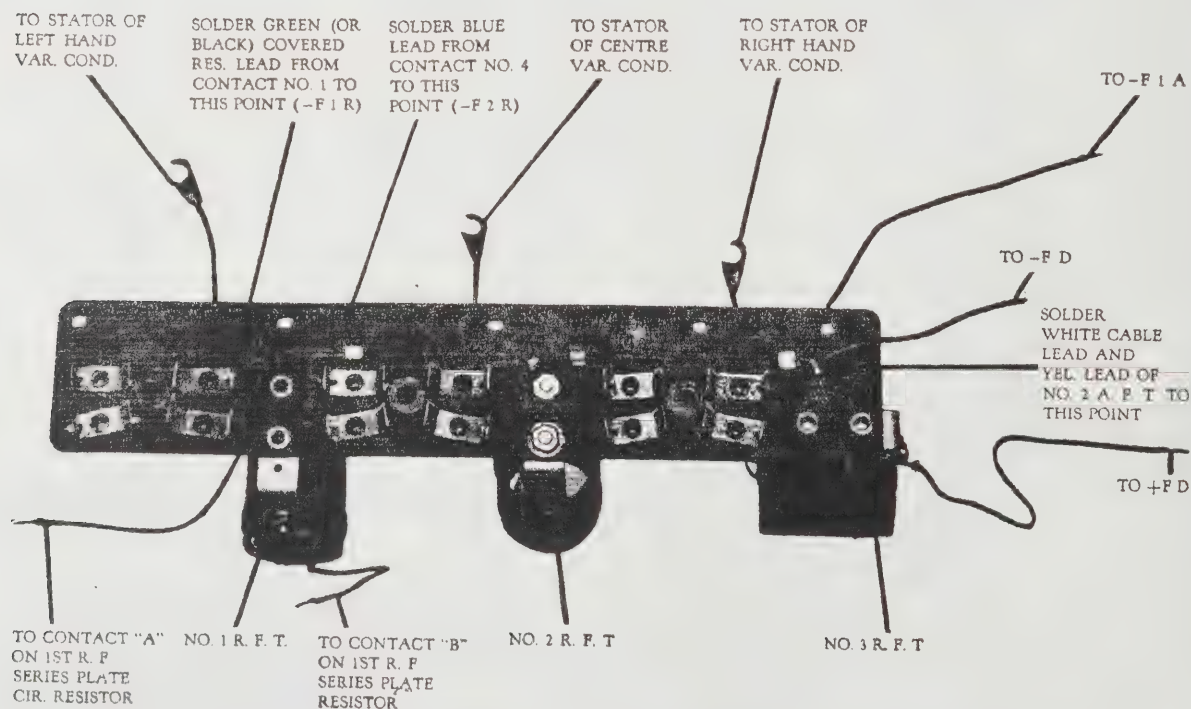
VIEW OF R. F. AMPLIFIER ASSEMBLY, SHOWING WHERE EACH LEAD IS TO BE CONNECTED.
